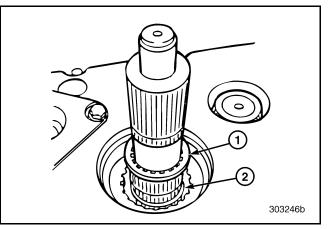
Removing Internal-Toothed Thrust Washer and Snap Ring (T313L/T318L Shown)
